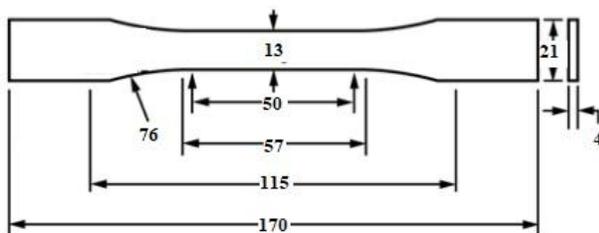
ASTM D- 638 Specimen dimensions[9]
